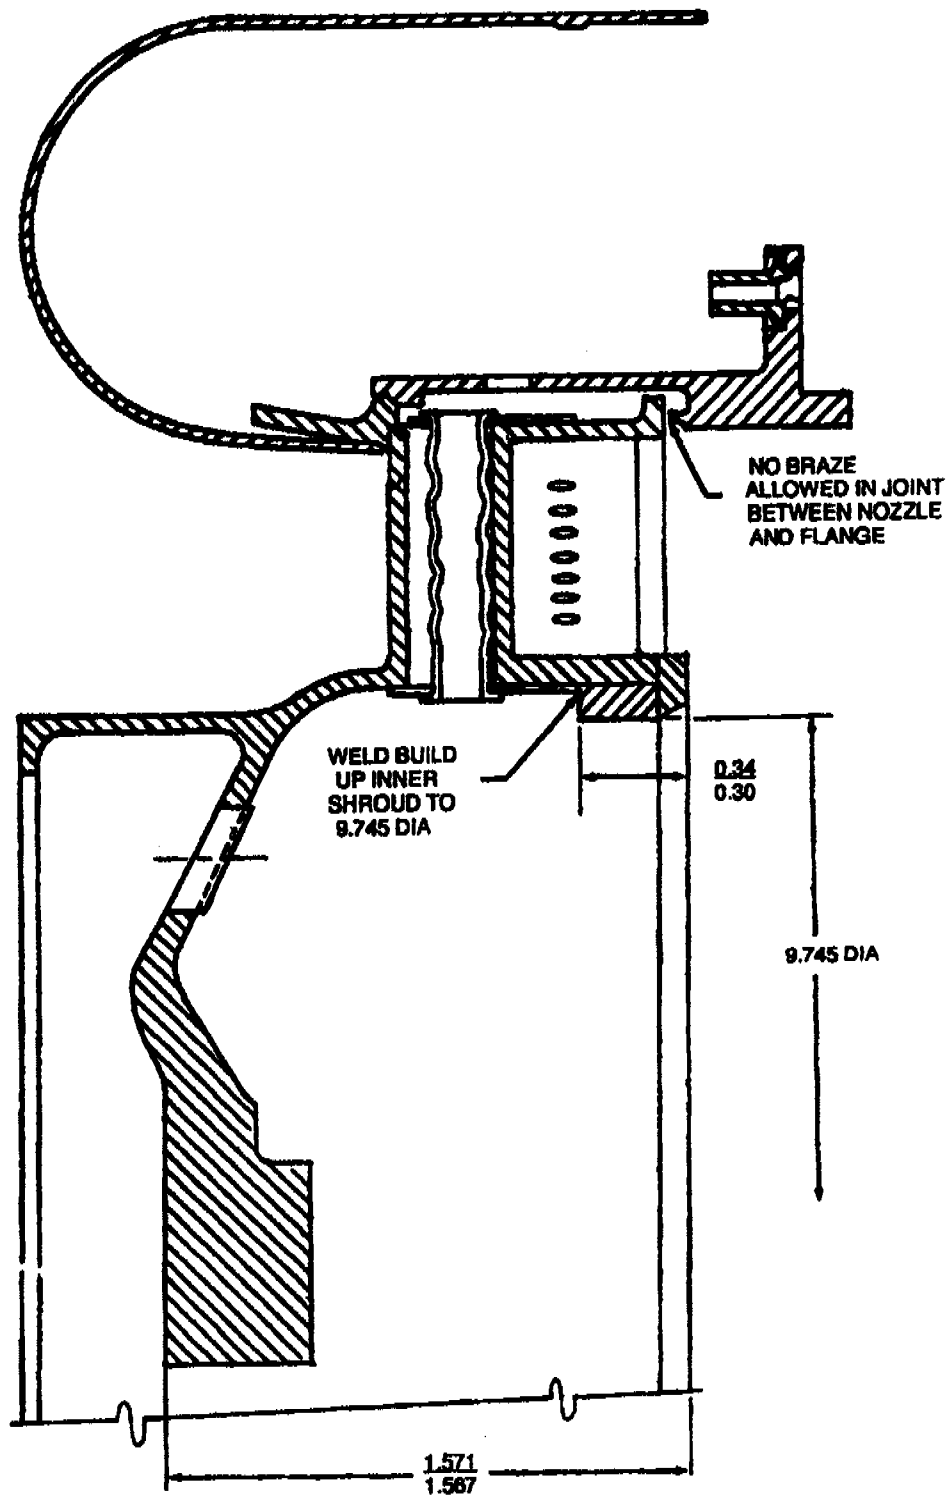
Stage 1 G.P. Nozzle (P/N 1-110-710-06) Brazing and Weld Build Up.
